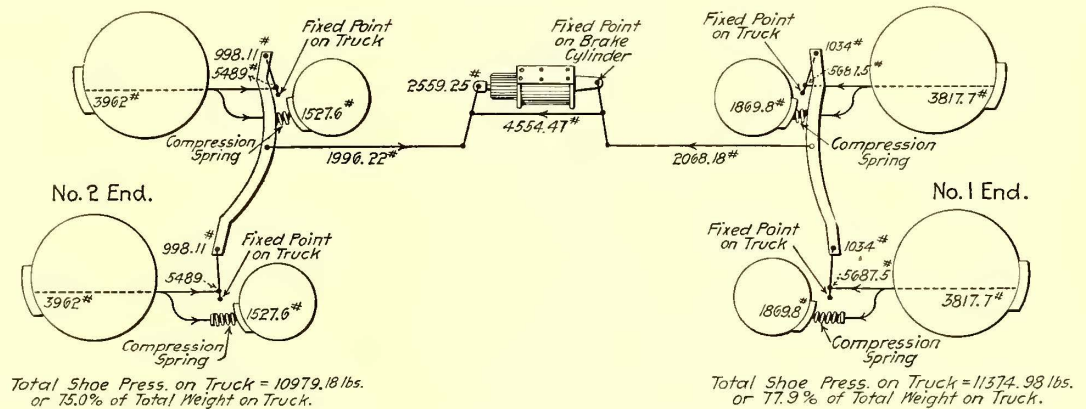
BRAKE LEVERAGE OF CAR UNDER TEST
